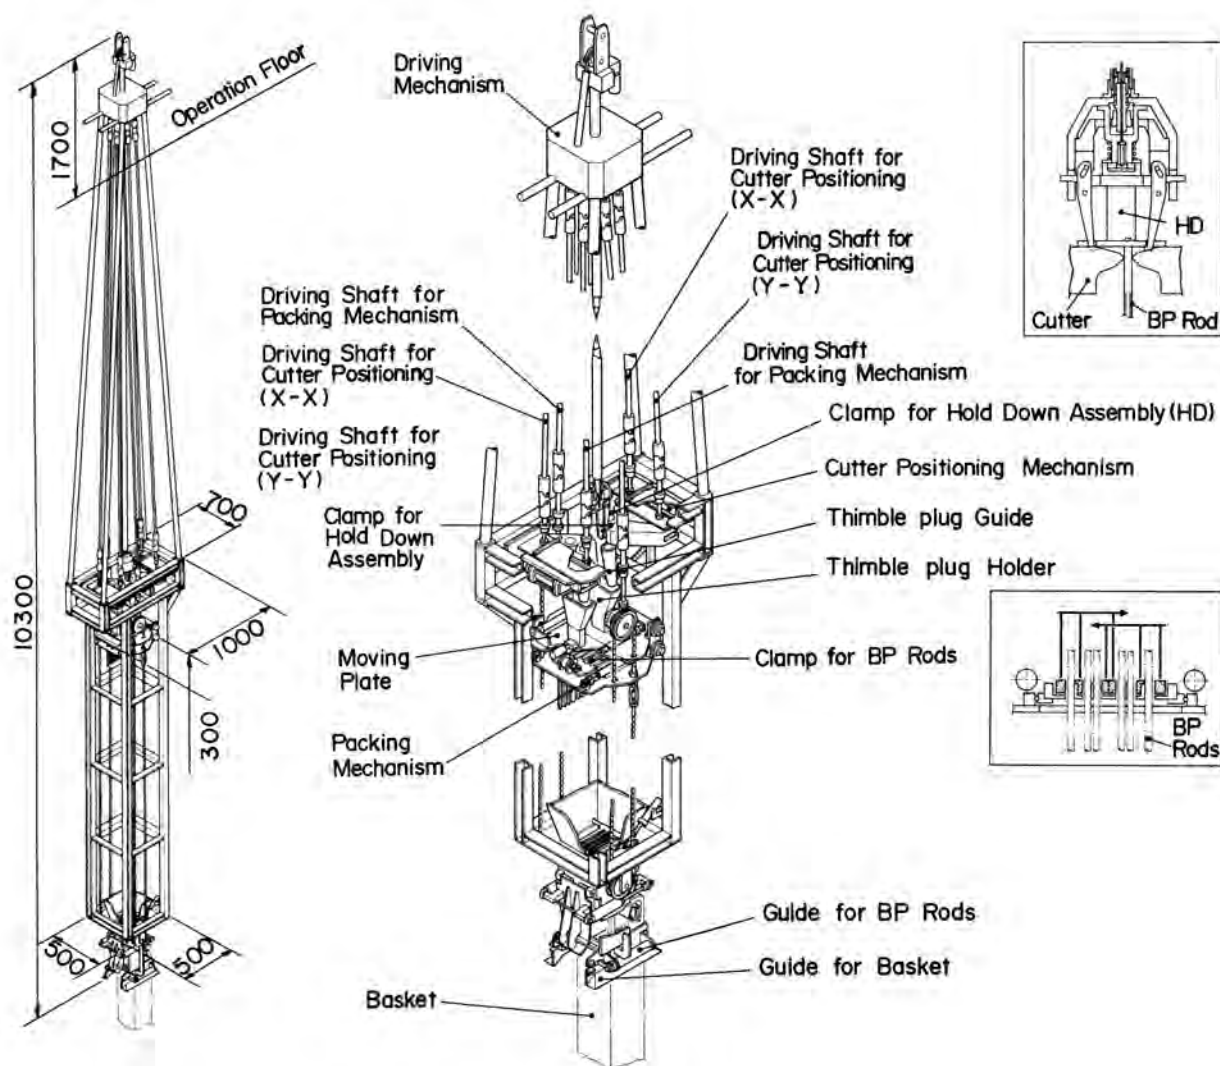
Consolidation Equipment for Spent BPRAs (Advanced Type).
